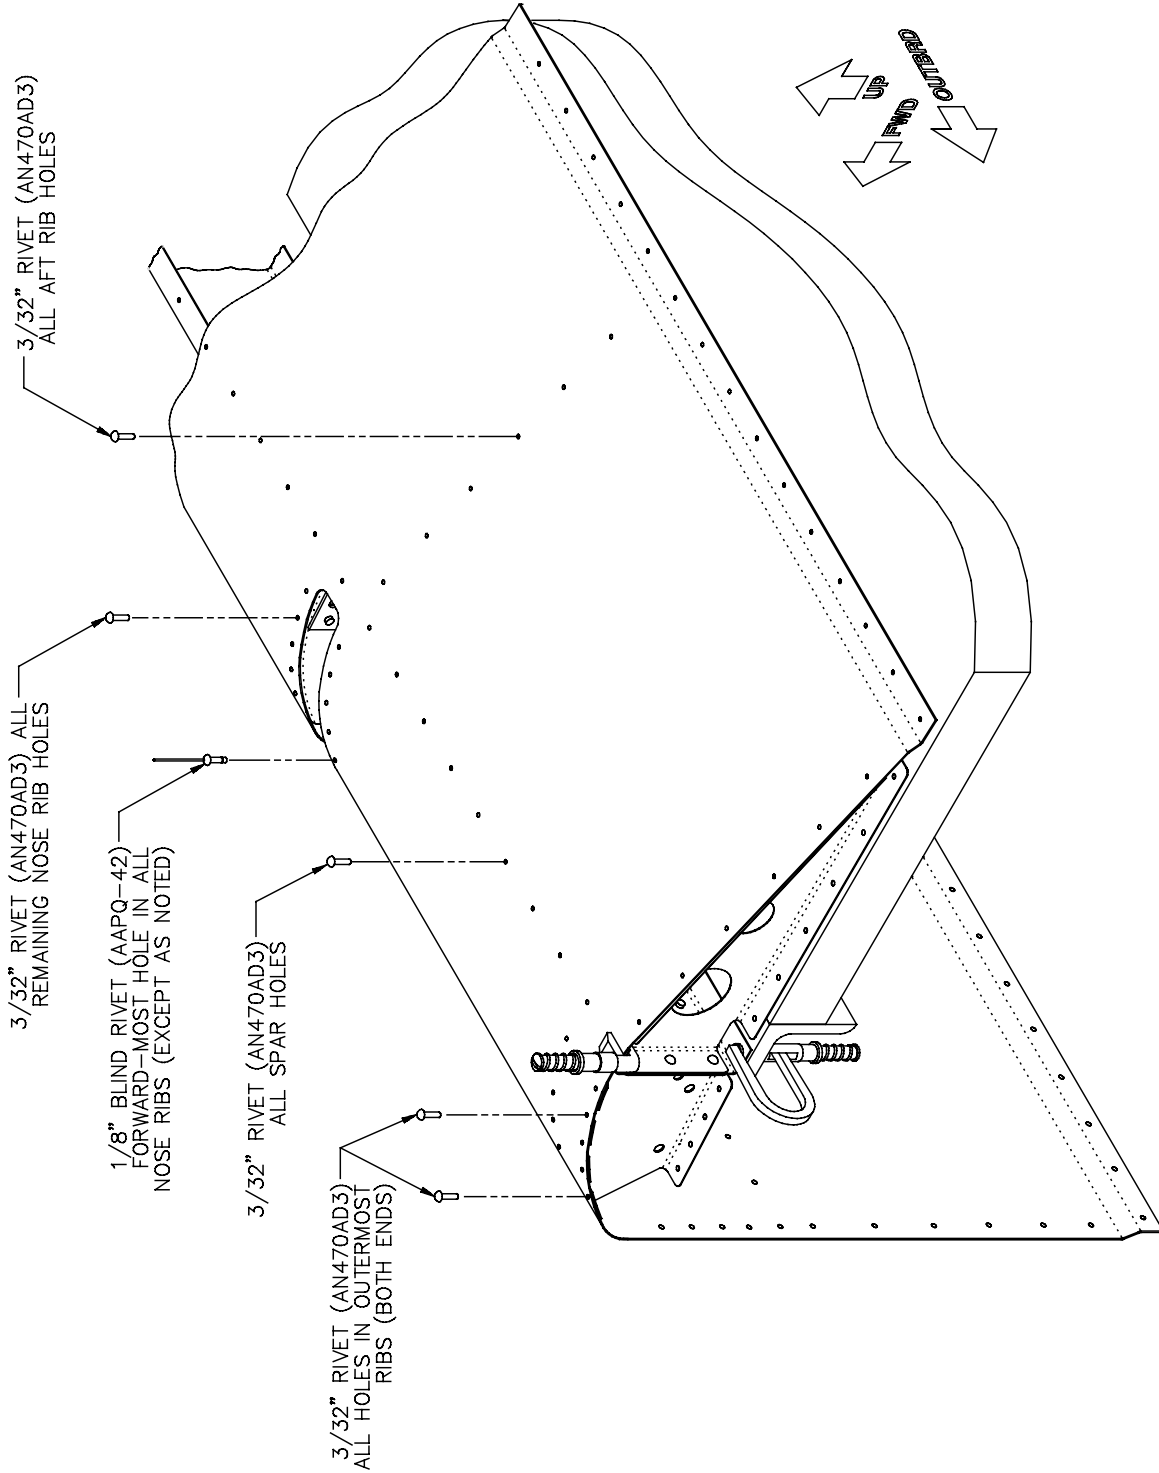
Riveting the Upper Surface of the Skin to the Spar/Rib Assembly
